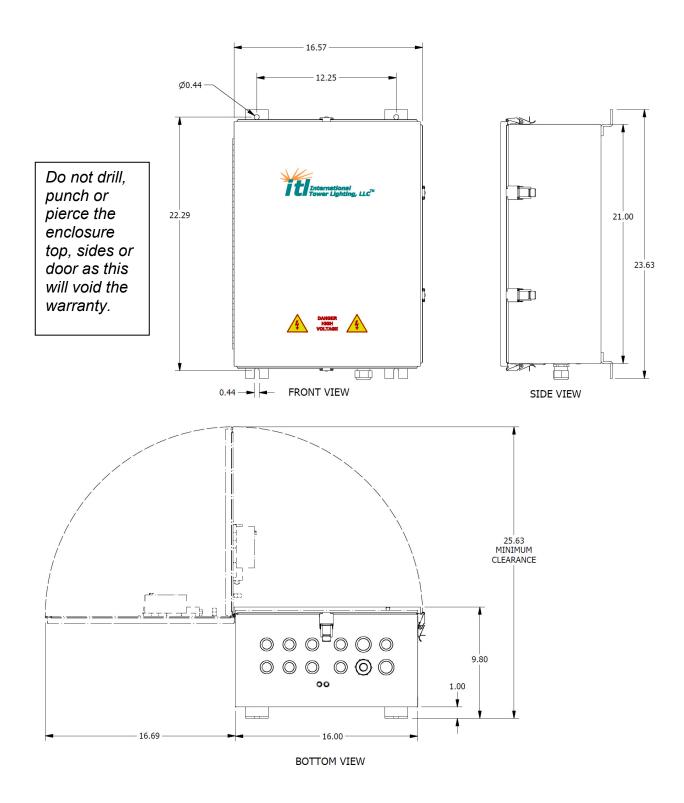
IPS-3600 Power Supply Dimensions and Mounting Details
